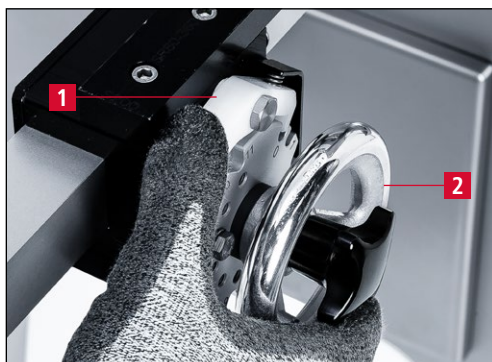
Bringing the grinding attachment into adjustment position "0"
